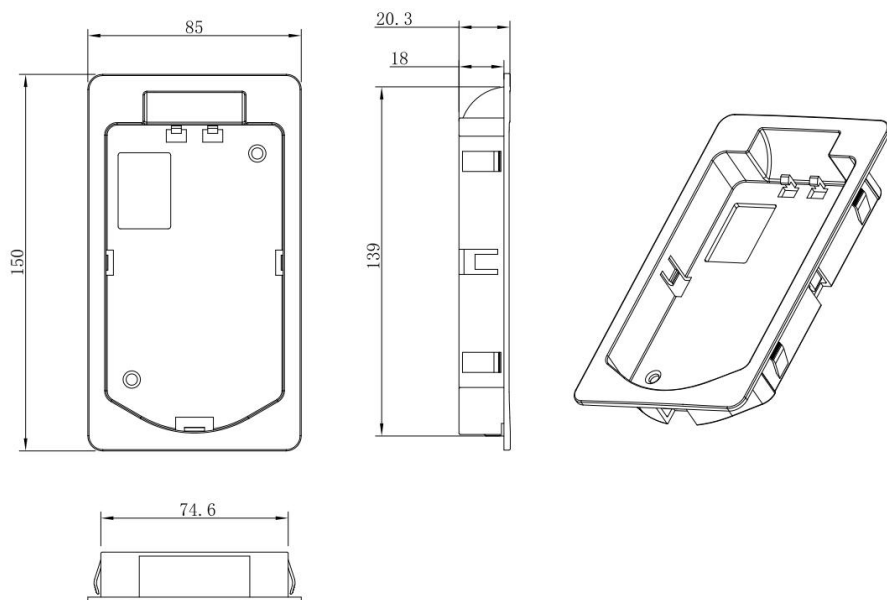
External Dimensions of Control Panel Bracket
